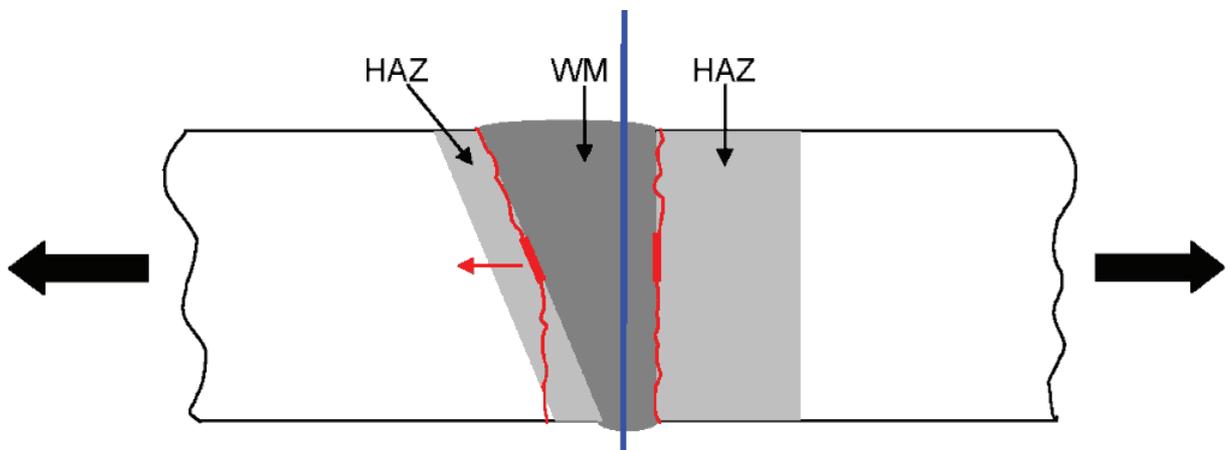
Likely Crack Paths depending on weld preparation detail.
